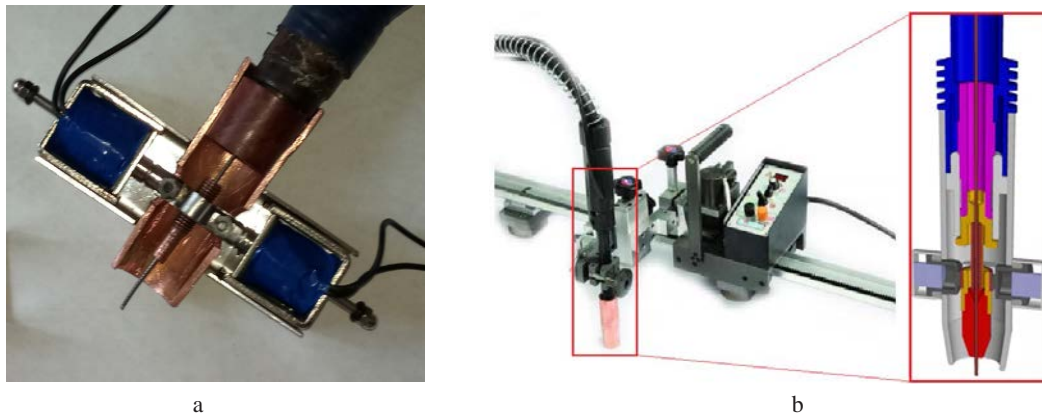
Appearance (with the half-nozzle removed) of the burner WTINOE (a) and the variant of its installation on the self-moving welding carriage (b)
